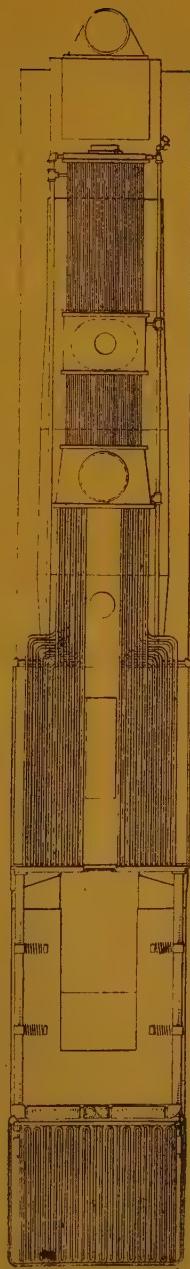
Proposed general arrangement of locomotive with induced and forced draft, centrifugal boiler feed pump, and steam condensing apparatus.
